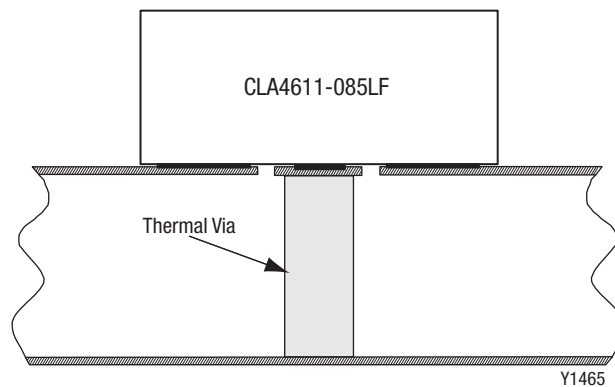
Cross-Sectional View of Suggested Printed Circuit Board
